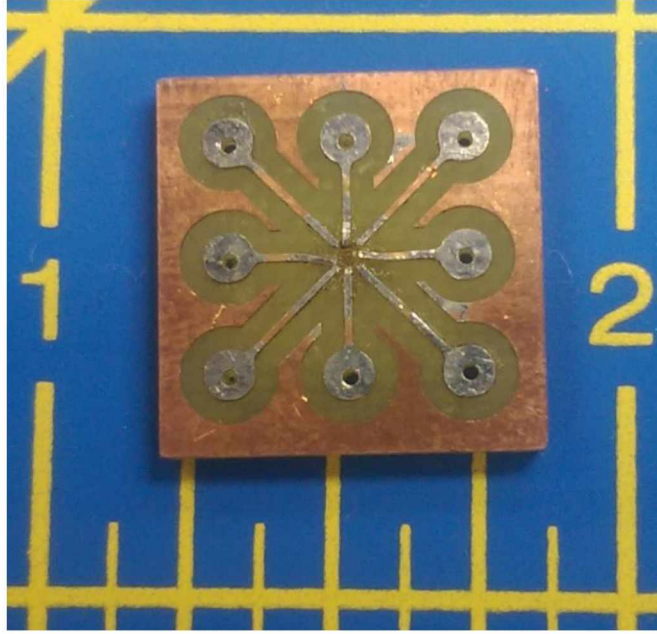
Close-up top view of the circuit board before the sensor was mounted.
